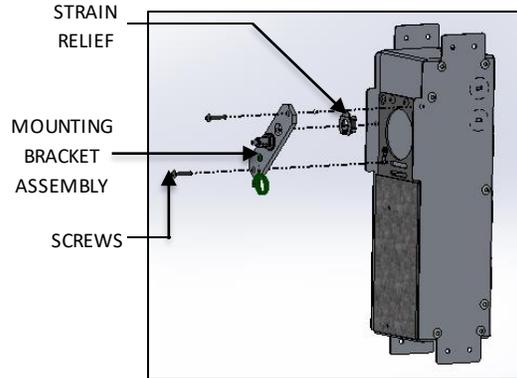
MOUNTING BRACKET DISASSEMBLY
